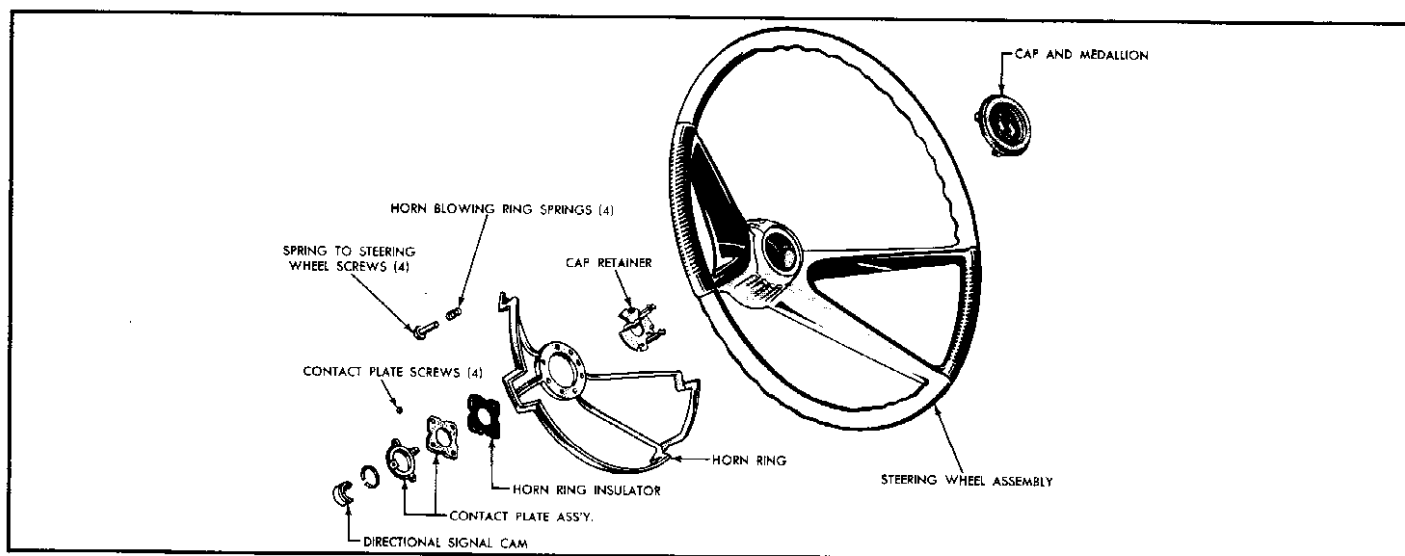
Steering Wheel, Horn Ring and Related Parts
